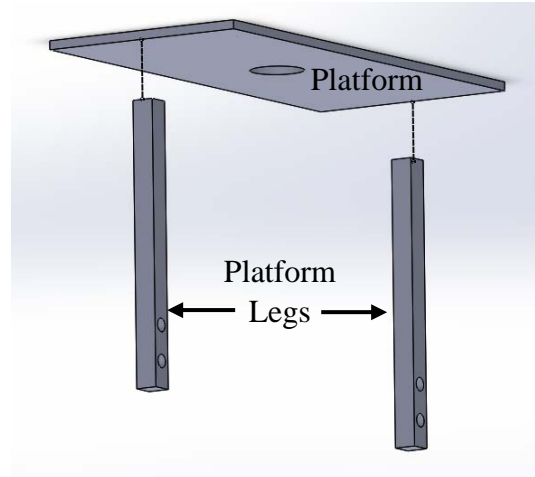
; Storage tank platform. The dotted lines represent where the parts connect and are welded together
